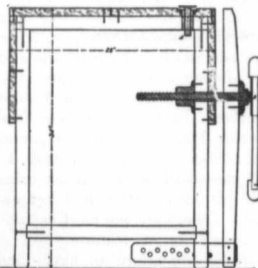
Cross section of workbench: A, planing stop; B, bench screw.
